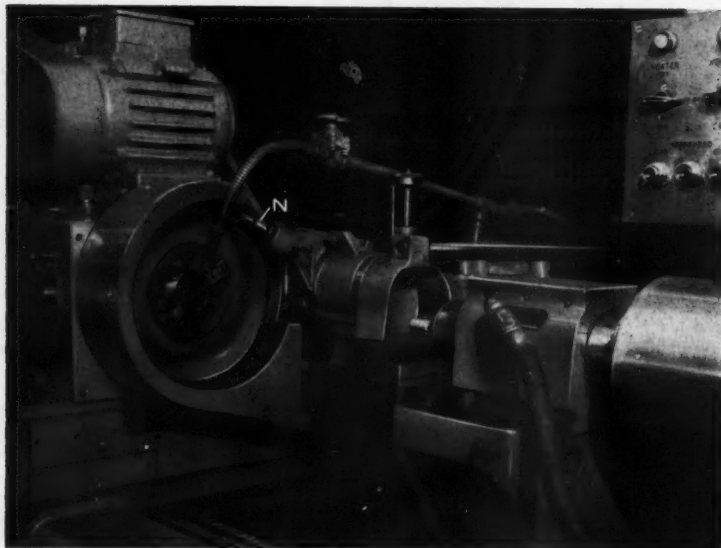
One of a battery of special Keighley grinding machines installed for finishing the cam profiles in the bores of cam rings
